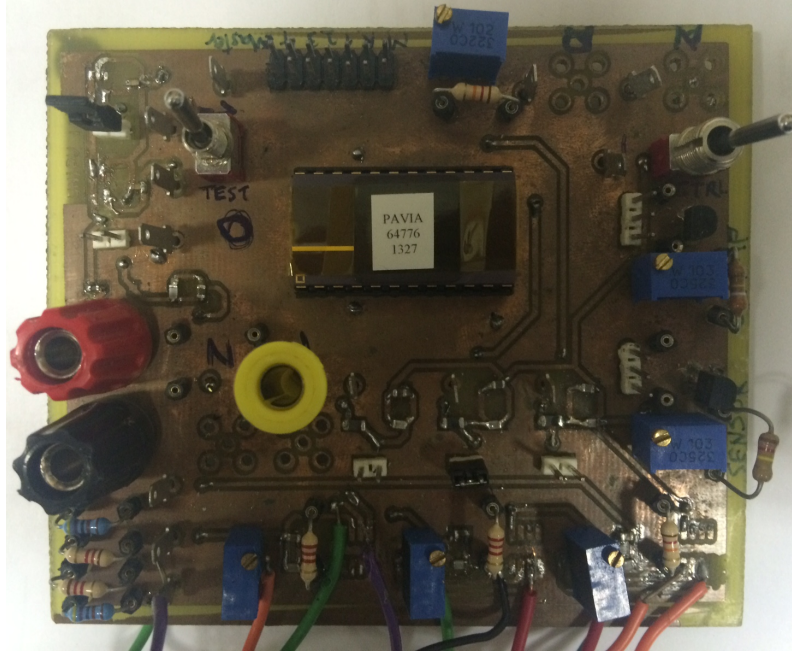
Fabricated 2-layers test board with soldered components.
